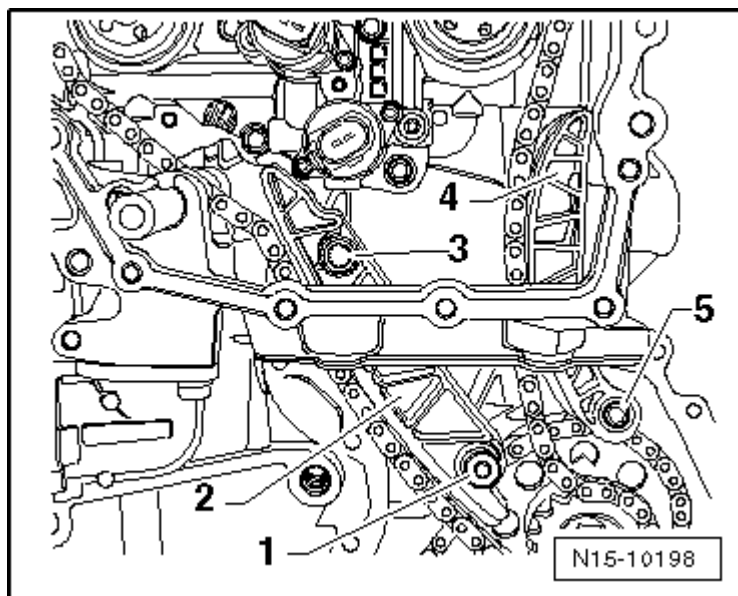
Inserting Tensioning Track And Installing Tightly On Cylinder Block With Bearing Bolt
